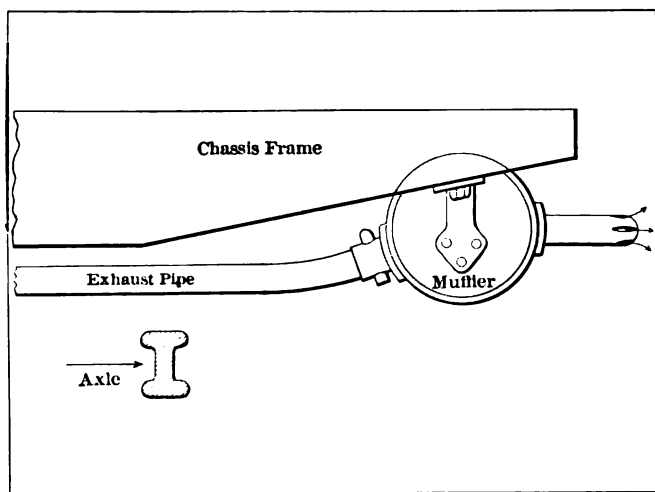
Faulty method of suspending muffler, showing exhaust pipe in the right position
